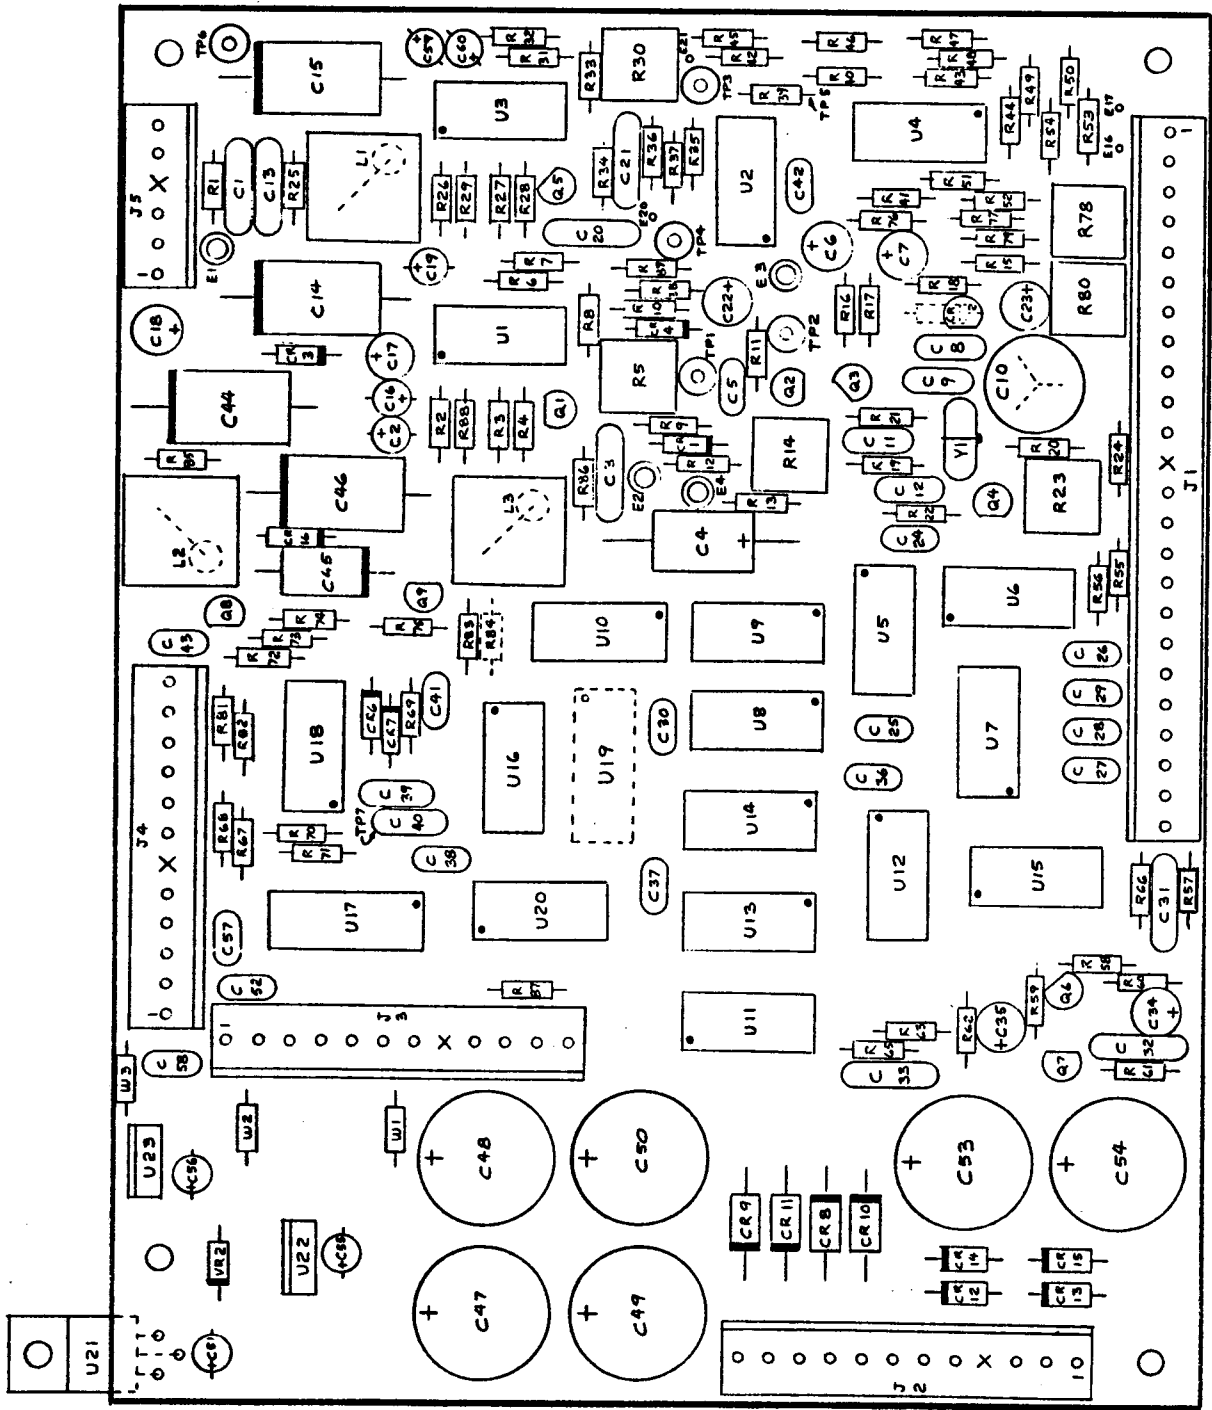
RECEIVER ASSEMBLY A2 COMPONENT LOCATION DIAGRAM
